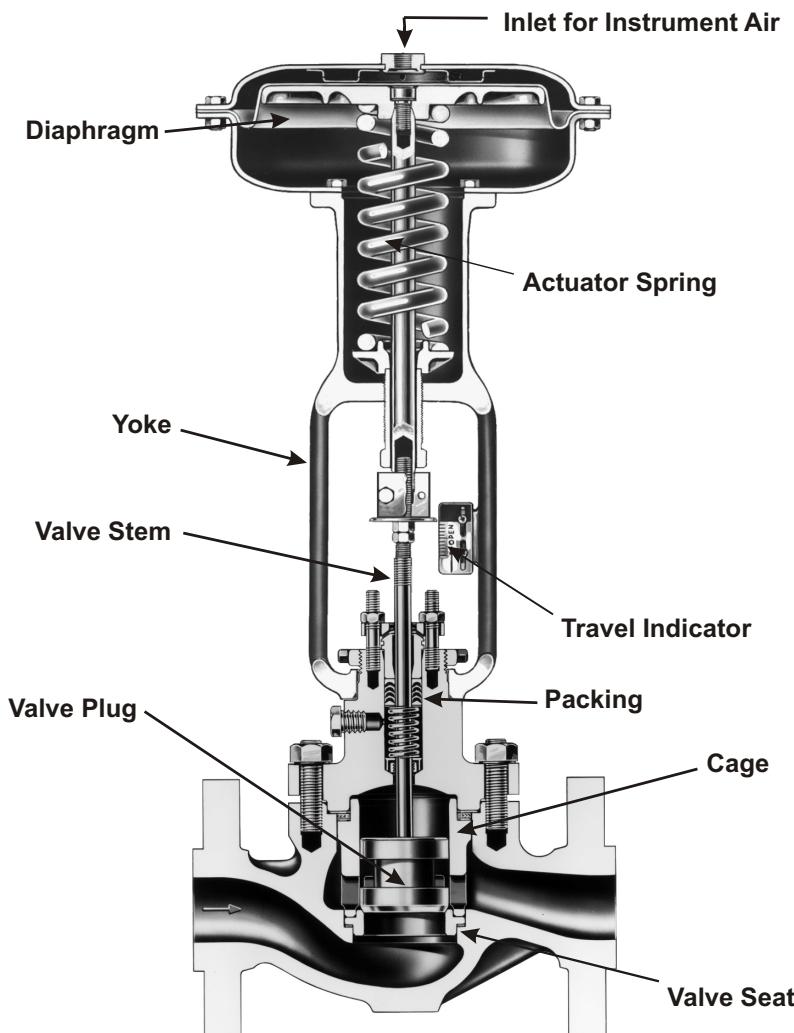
Cross-section of a globe valve. Courtesy of Fisher-Rosemount.
